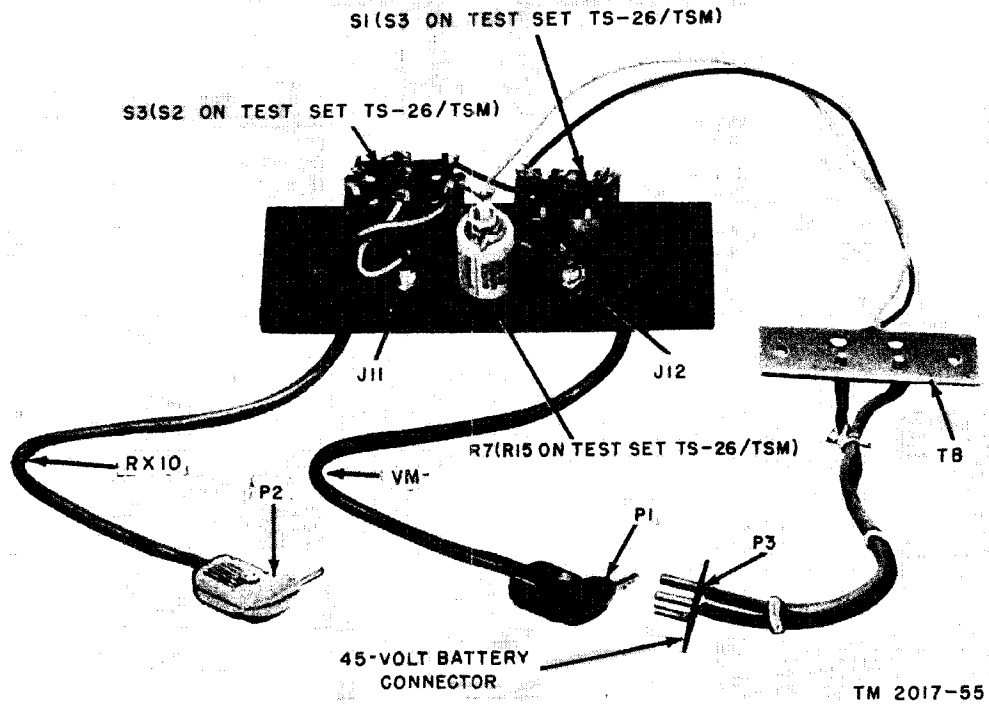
Test Set TS-26(\*)/TSM, switch panel assembly, rear view.
